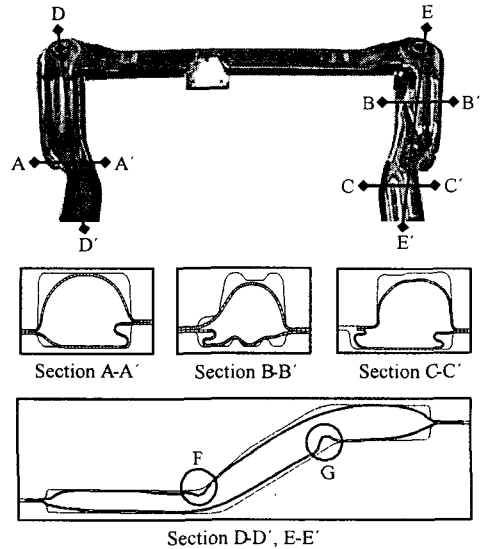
Wrinkling for welded blank hydroforming
